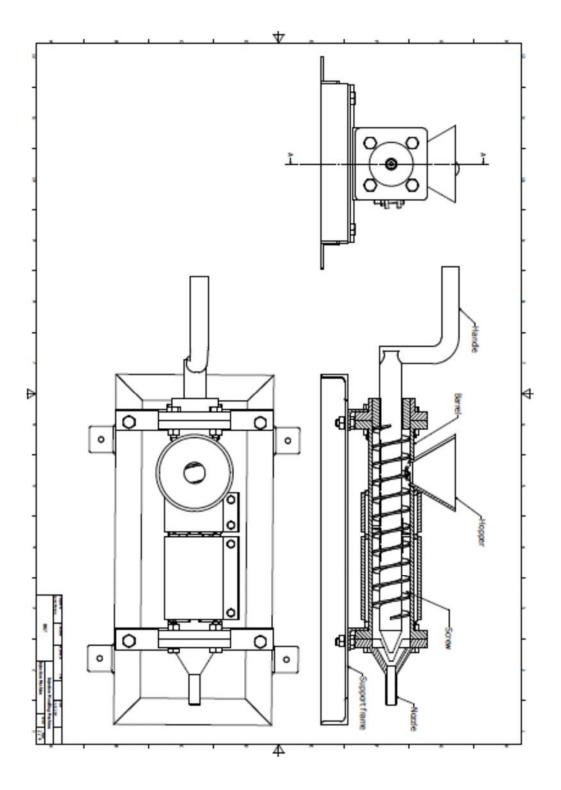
The Injection Machine Section View with Plan and Front Elevation.
